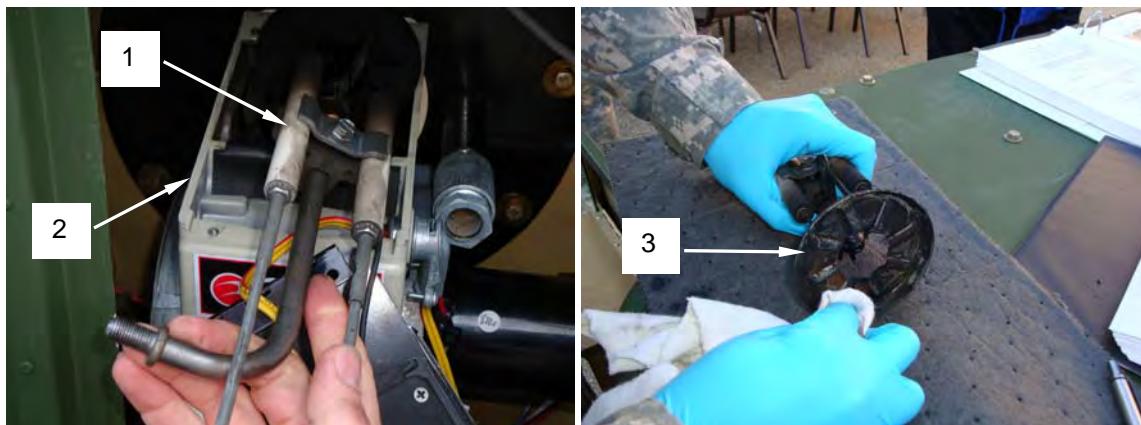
Removing Nozzle Assembly and Cleaning Swirlers.
